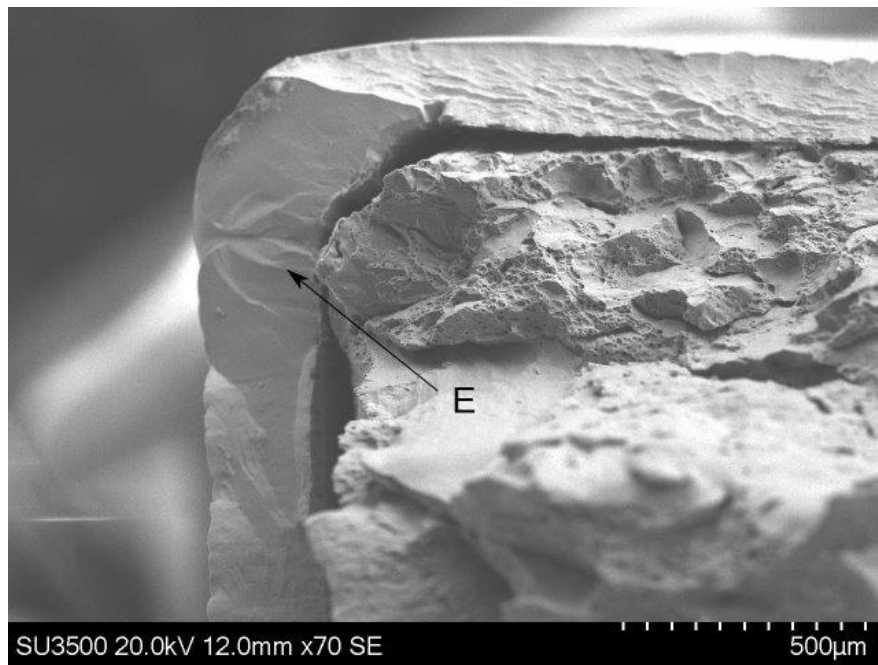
Location E in the coating of the fracture surface of Specimen H2.
